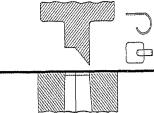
Angular part of punch shears tab of the part and curls it, then the flat part of the punch blanks the completed piece.
